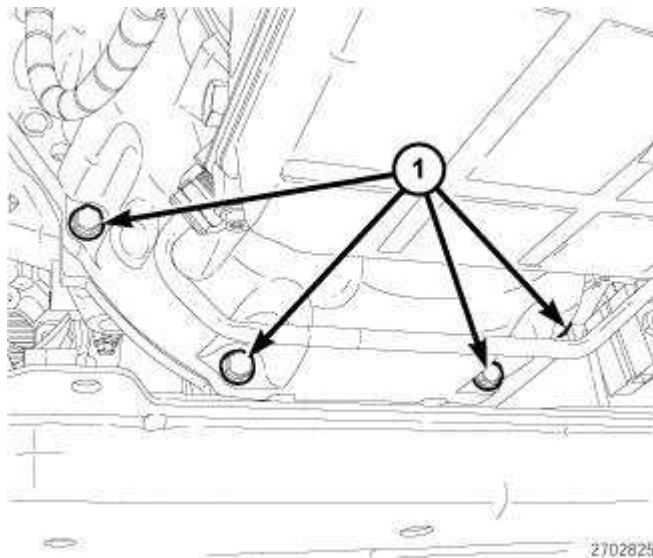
Transmission-To-Engine Oil Pan Bolts
